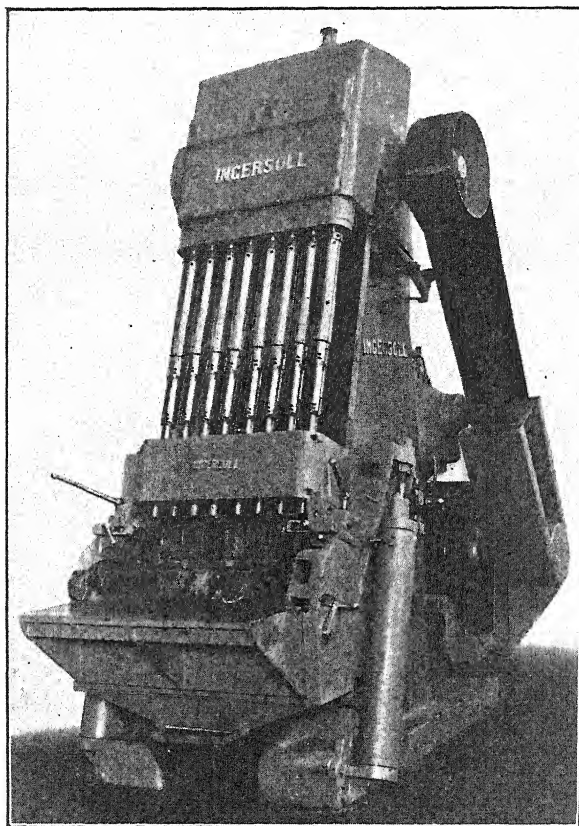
An Ingersoll Milling Machine Co. Eight-Spindle Cylinder-Boring Machine for Rough- and Finish-Boring the Eight Cylinders of an Automobile Cylinder Block at One Setup.
